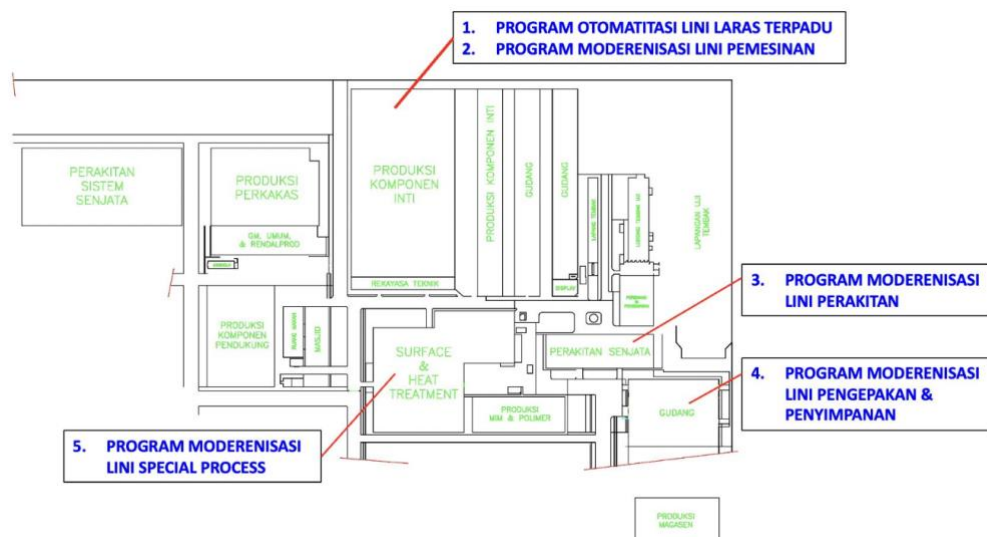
Layout Plan of the Production Facility of the Weapons Division
